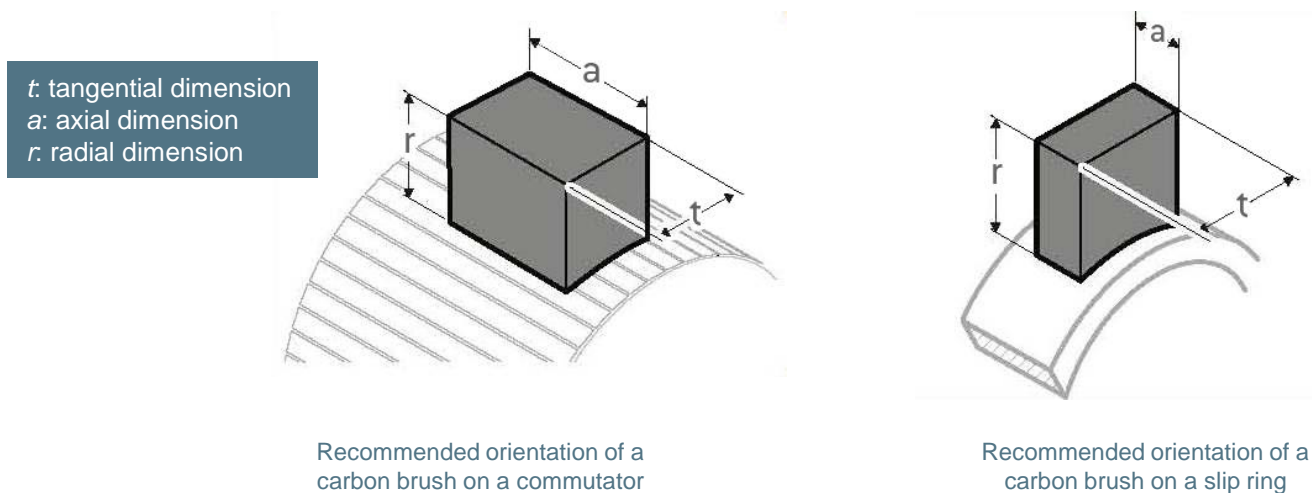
Nomenclature of brush dimensions (in accordance with IEC 60276 and IEC 60136)
